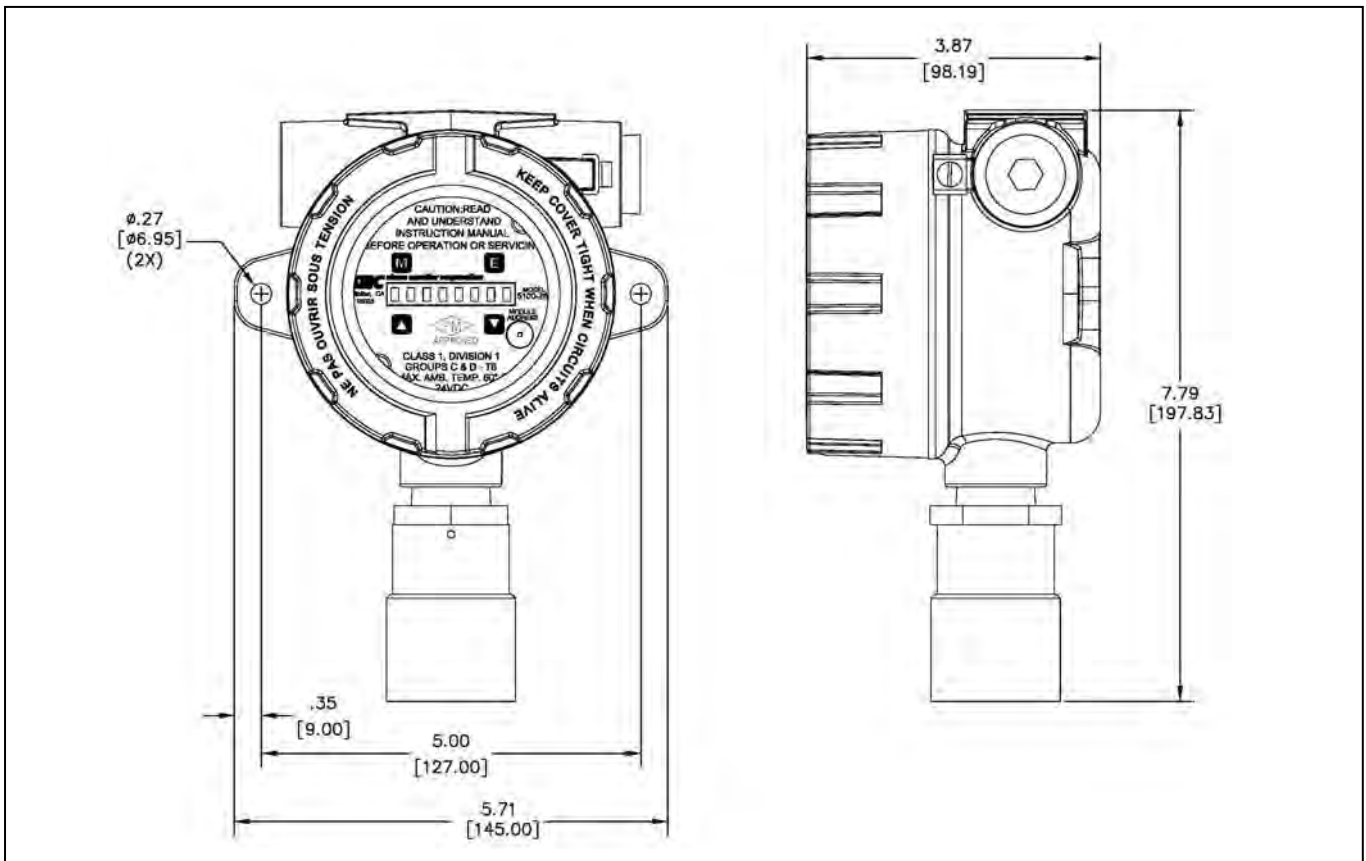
3: Model 5100-28-IT-A1(and A2) Combustible Sensor – Cast Aluminum Enclosure, Dimensions
